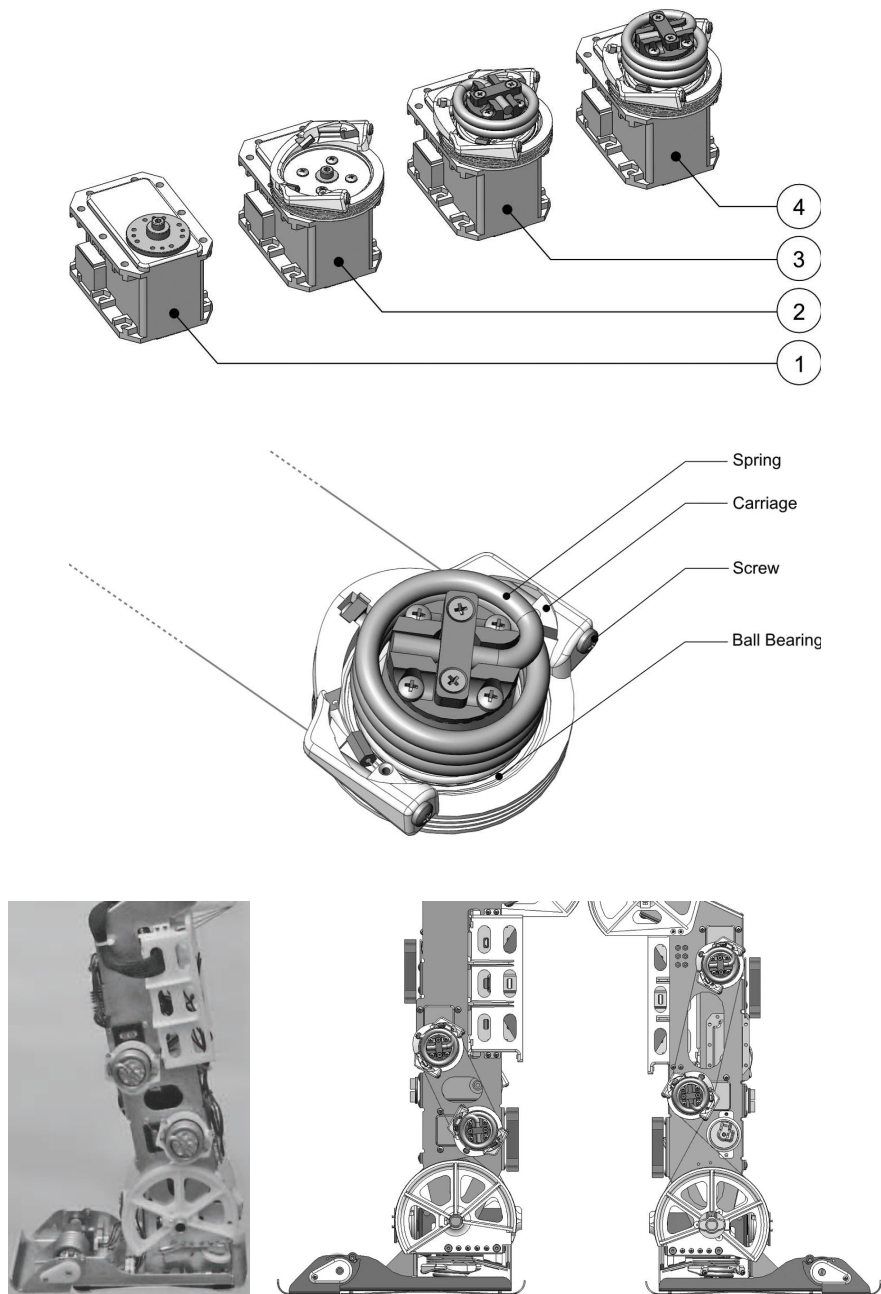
Mechanical details of the flange assembly. Top: An interlocking ring and a lock spring allow for easy snap-in of body parts. Bottom: The exoskeleton is mechanically coupled to the flanges, so that an optimal force distribution between body parts can be guaranteed.
